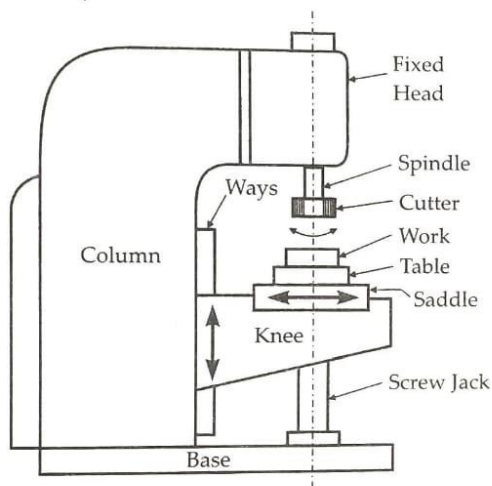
Vertical Milling Machine with Fixed Head.
